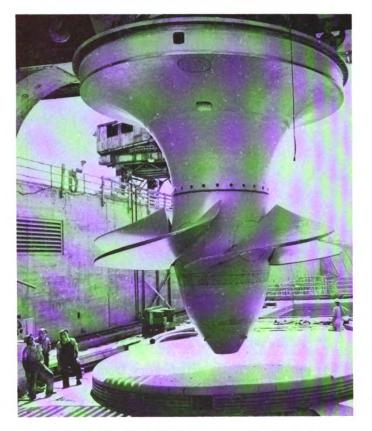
Typical Kaplan runner—Fort Loudoun.
